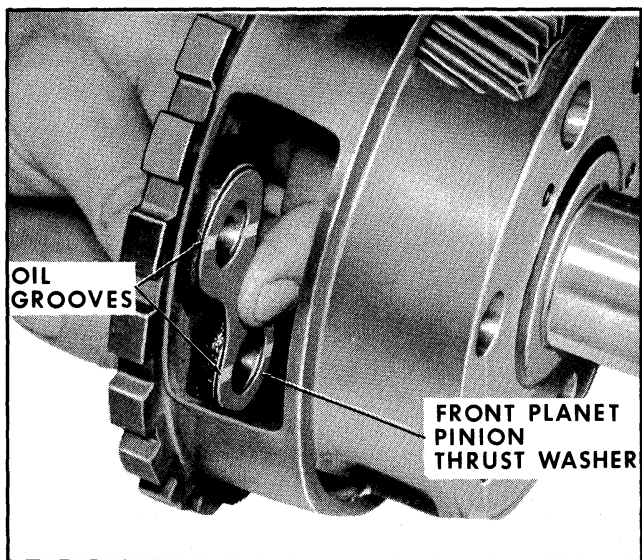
B-93 Installing Long Pinion Front Thrust Washer
